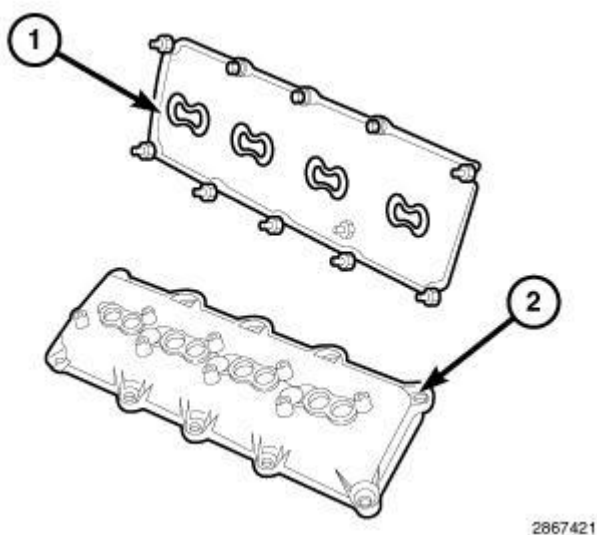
Cylinder Head Cover Gasket & Cylinder Head Cover
